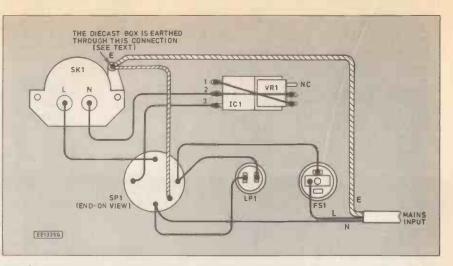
Interwiring details to the "load" socket SK1, mains suppressor SP1, IC1/VR1, power on lamp and fuse FS1. Use cable rated at 6A minimum and cover all soldered joints with insulated sleeving.
